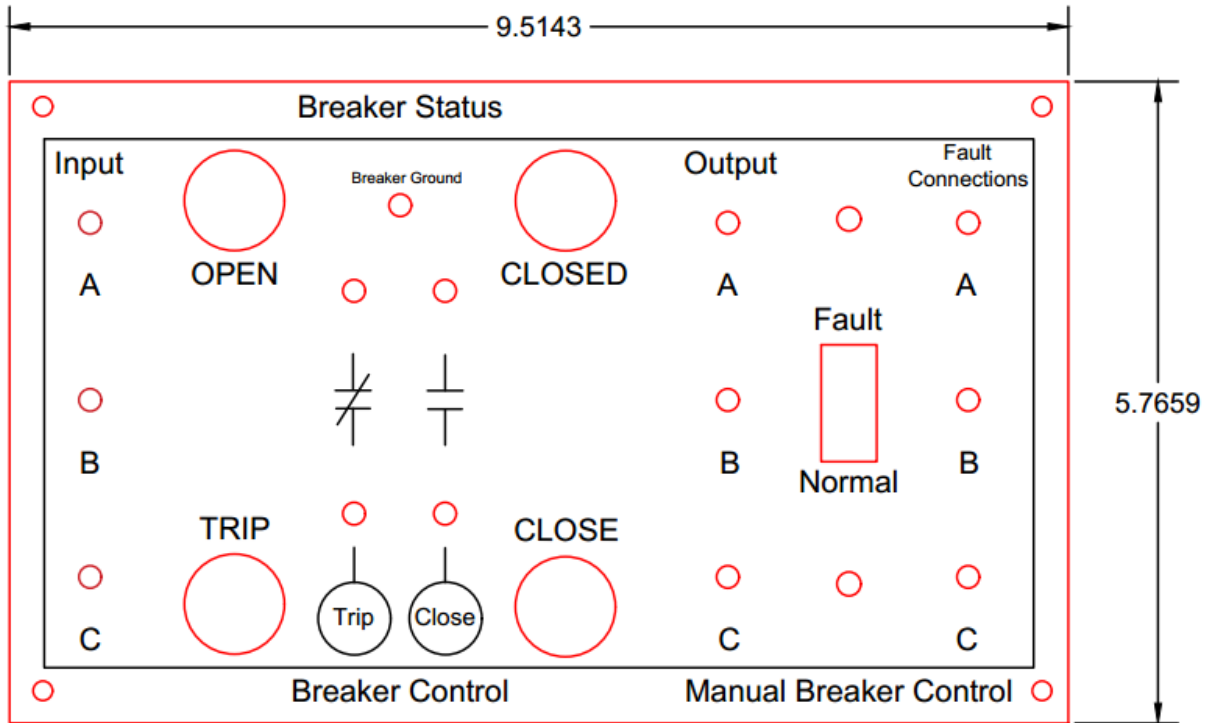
Dimensions of Redesigned Acrylic Faceplate. Red coloring indicates cut-through lines; black indicates surface etchings for text and symbols.
